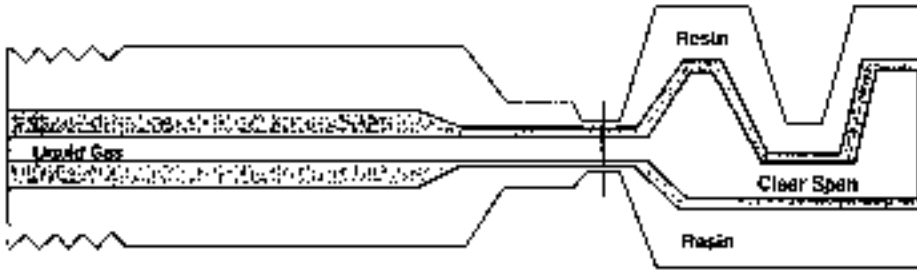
HELGA® liquid gas-assist process: Liquid gas is injected into the mold using a special nozzle and then expands to form hollow cores
